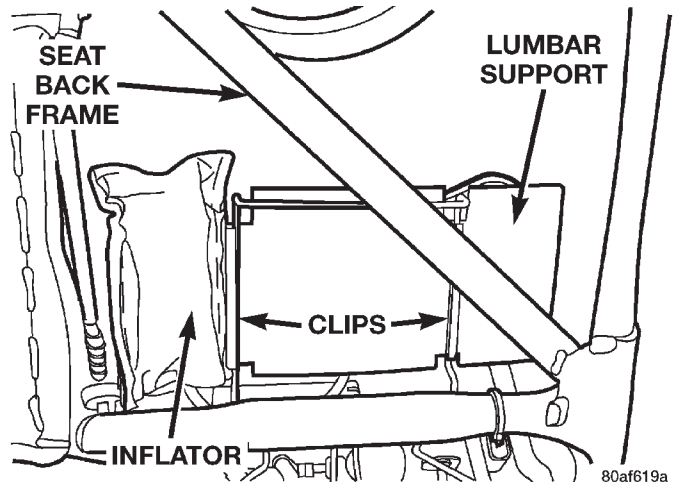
Power Lumbar Adjuster and Motor Remove/Install
